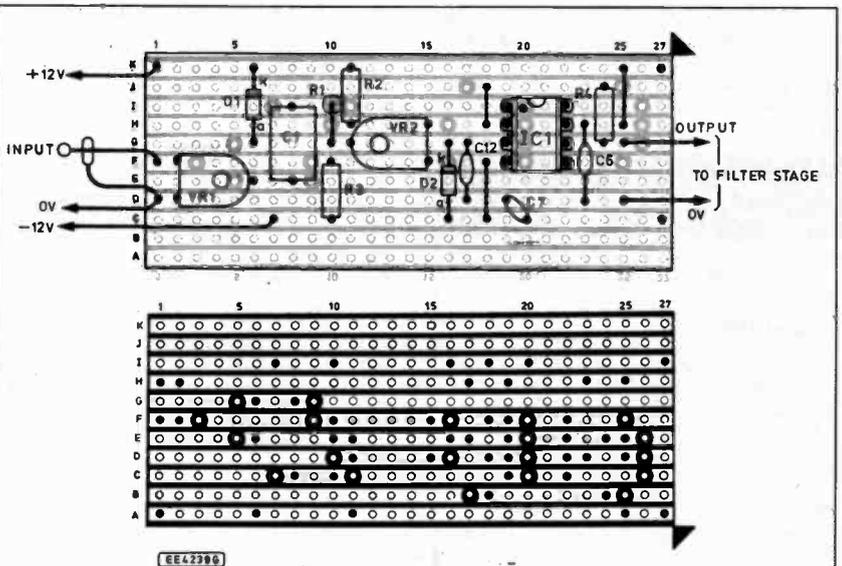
Stripboard component layout and details of breaks required in the underside copper tracks of the Buffer board.
